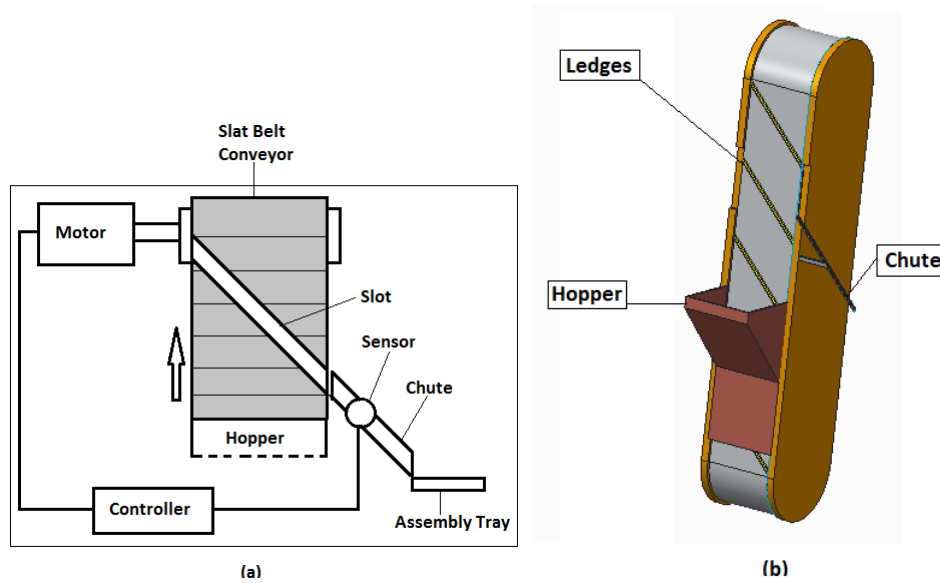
a) Schematic diagram of Assembly Vending Machine b) Elevating hopper feeder for wheel shaft
